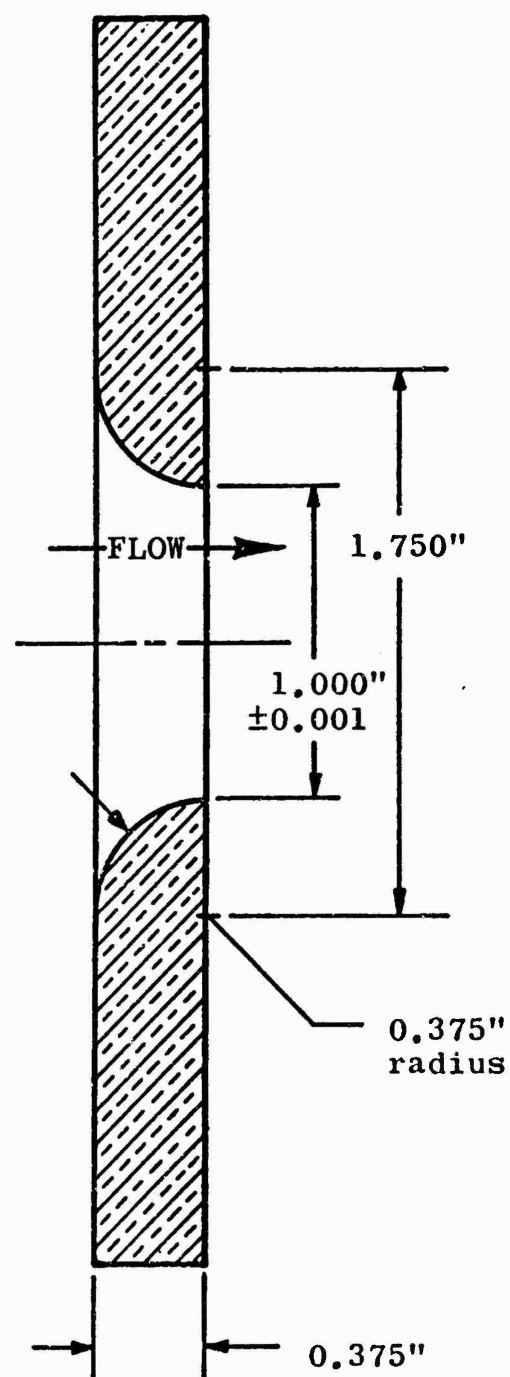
1.000 INCH DIAMETER SMOOTH APPROACH NOZZLE.
